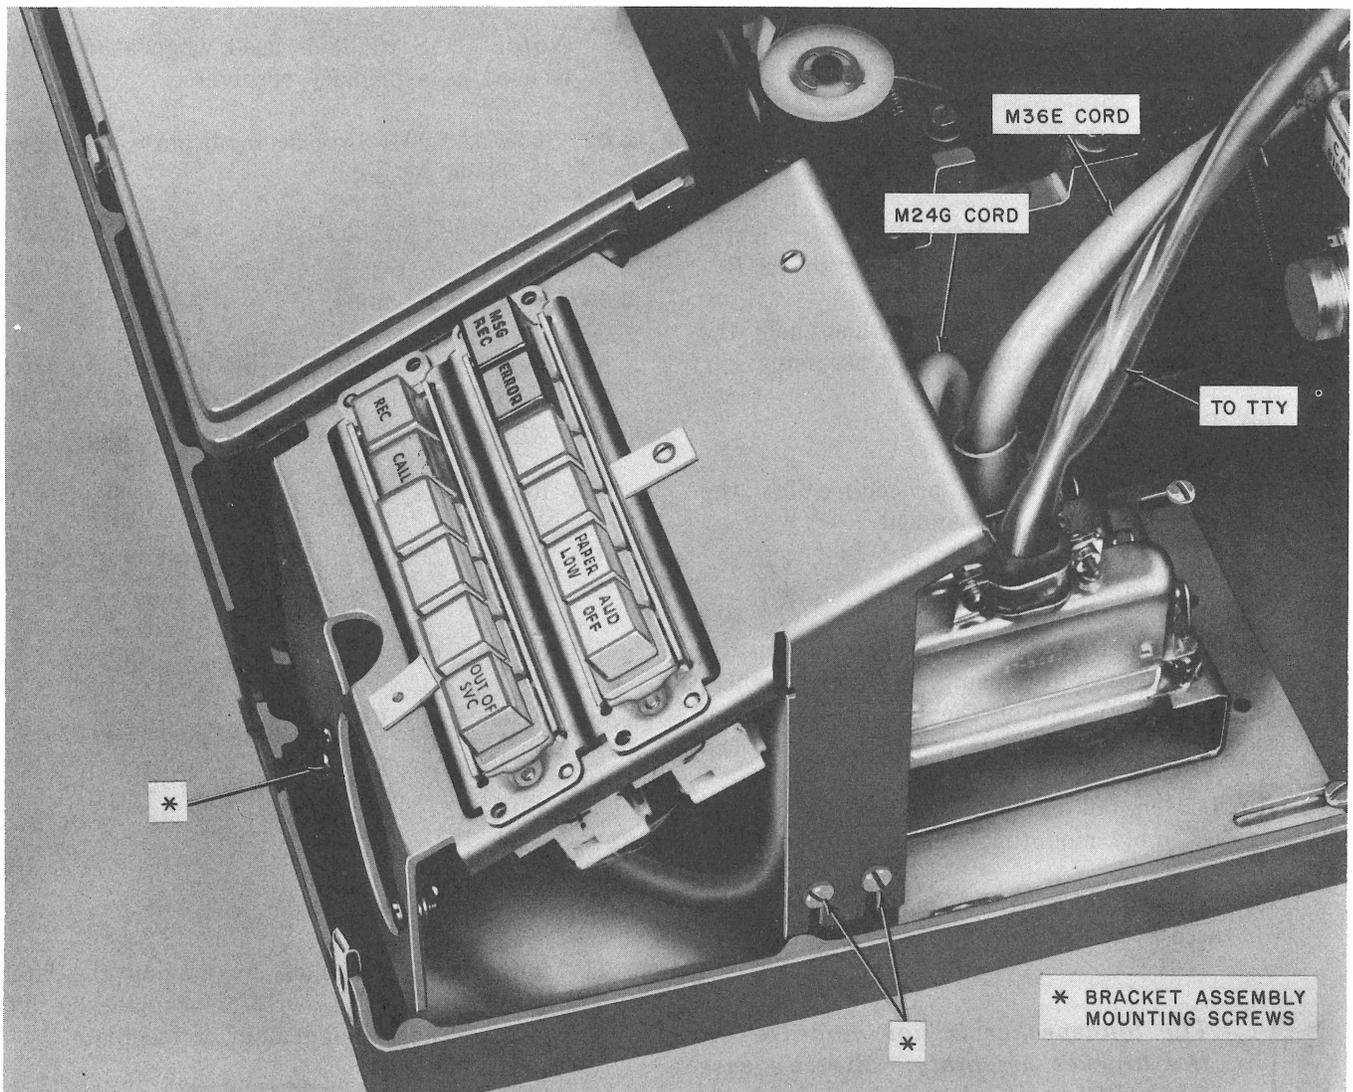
Data Auxiliary Set 804N2, Mounted in Model 33 RO Teletypewriter
